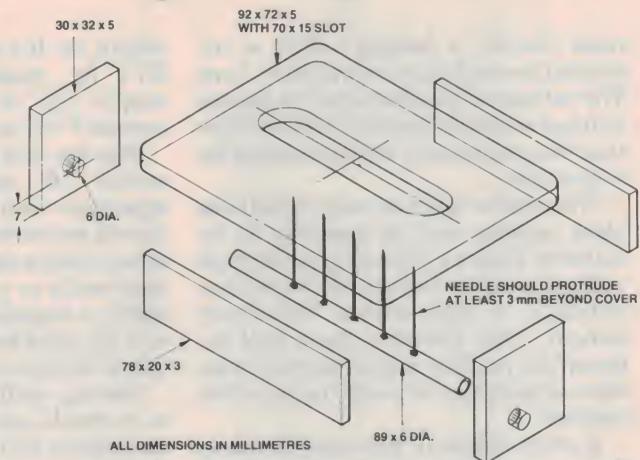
Exploded view of our emitter head assembly. We used 5 mm and 3 mm thick perspex, but it could all be made from 5 mm perspex. The two pictures below show the completed head. Brass tubing supports the needles, which are soldered to it.
